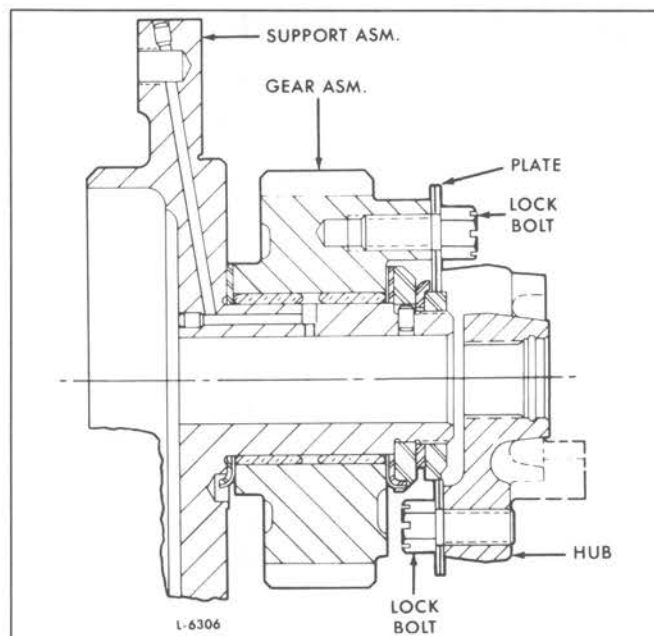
Rear Hub Assembly - Turbocharged Engines
